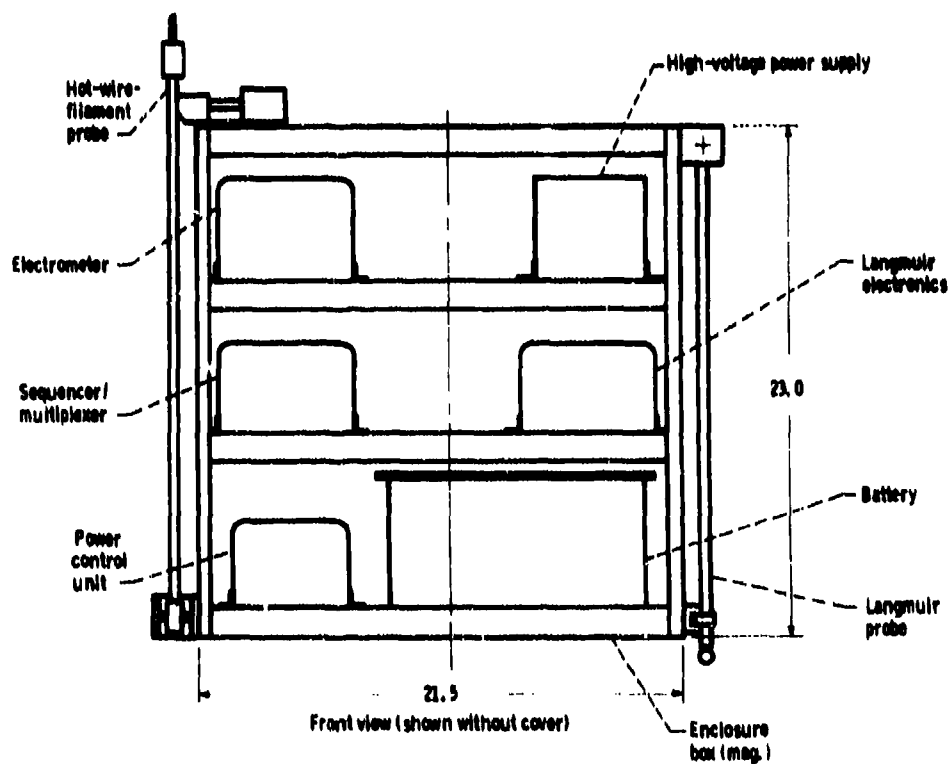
Enclosure box assembly. (Dimensions are in inches.)
